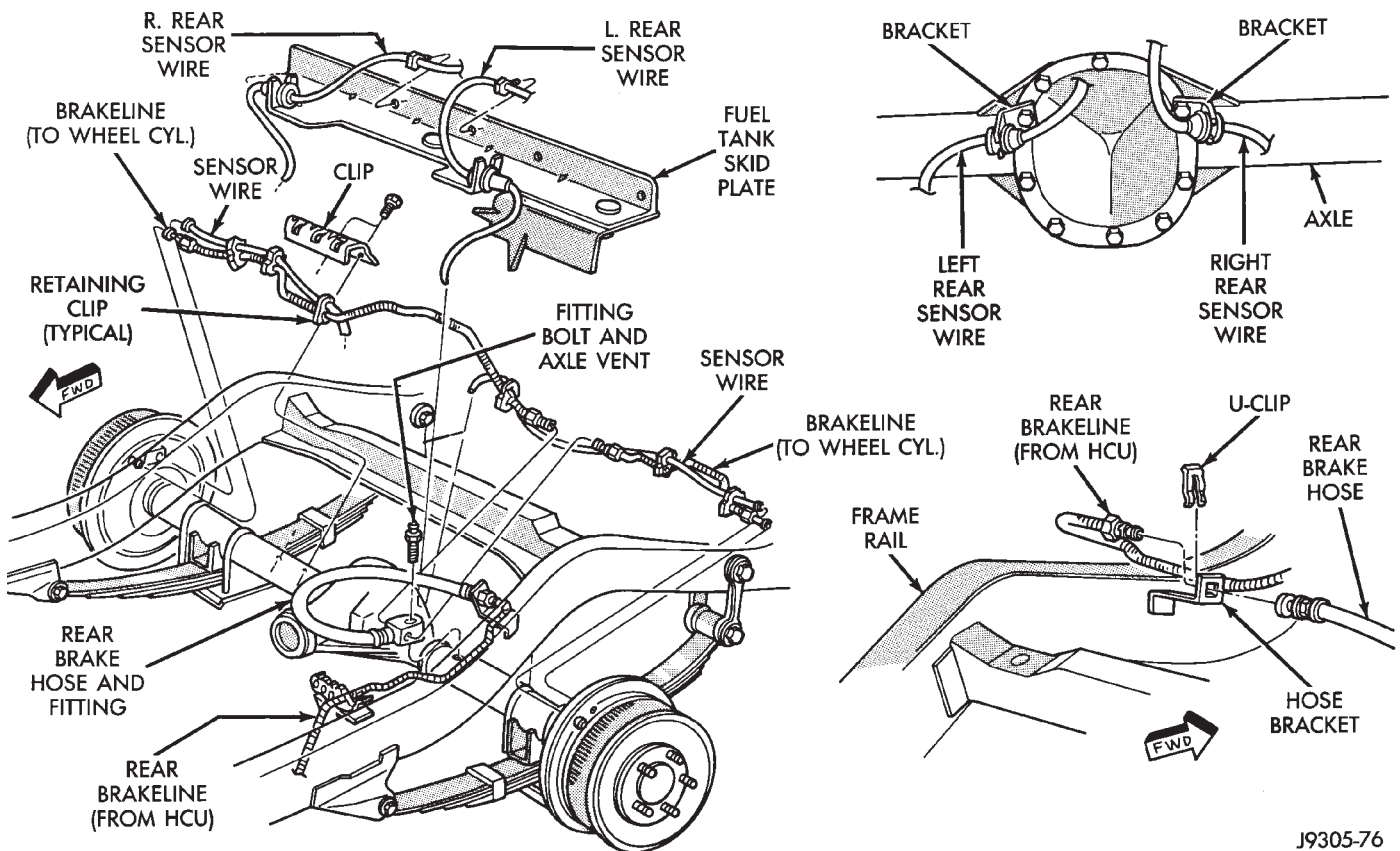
Rear Brakeline Routing (YJ With ABS Brakes)
